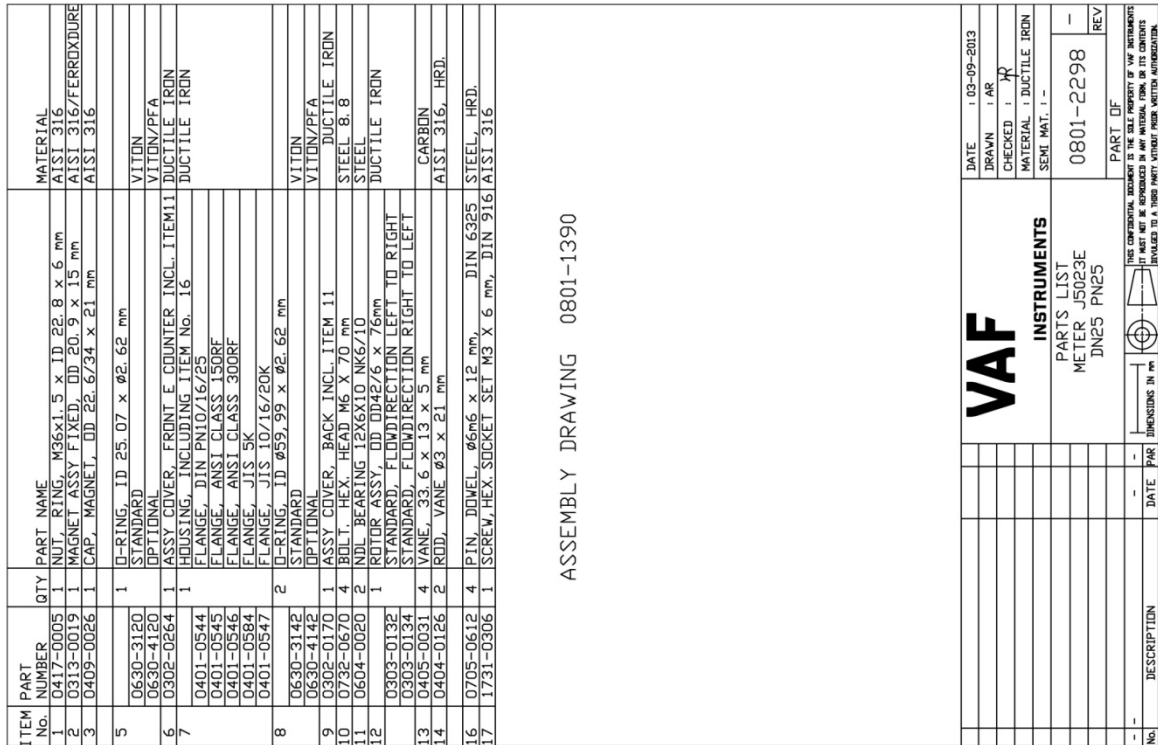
Drawing 0801-2298 – Partslist J5023E DN25 PN25
